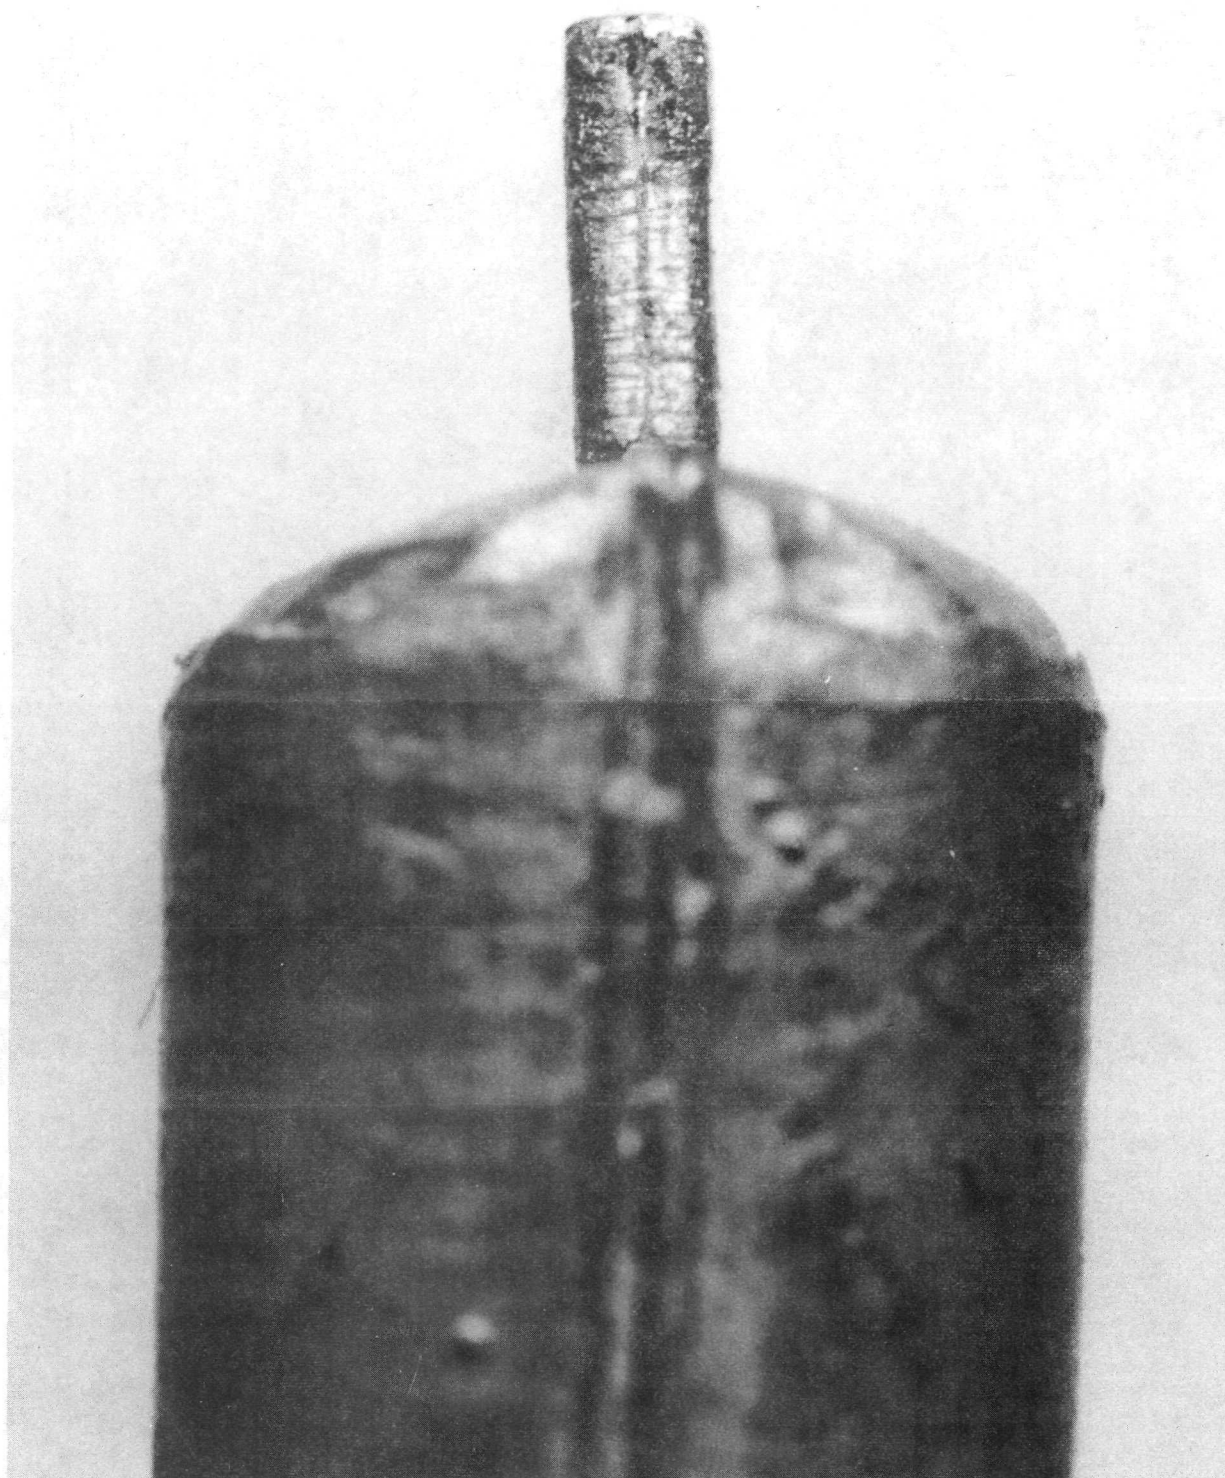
Completed 0.030 in. Diameter Tip Single Probe
